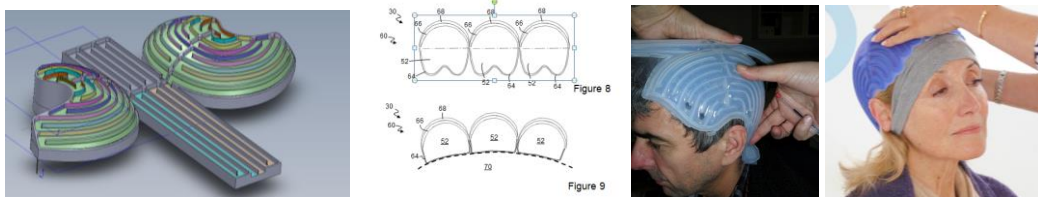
Initial tool and groove design (a) channel section (b) initial prototype (c) and current cap (d).
